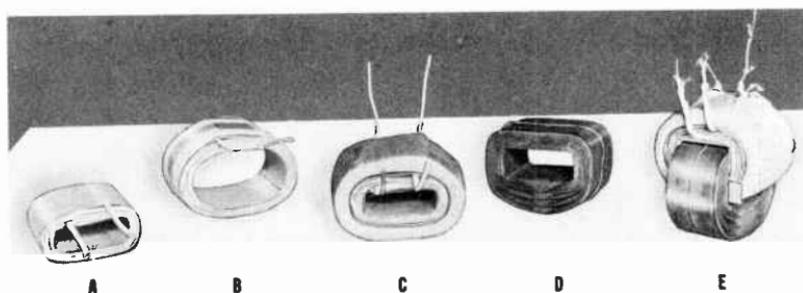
Unassembled and assembled parts of a bent-iron core-type transformer. (Courtesy of Kuhlman Electric Company.)
